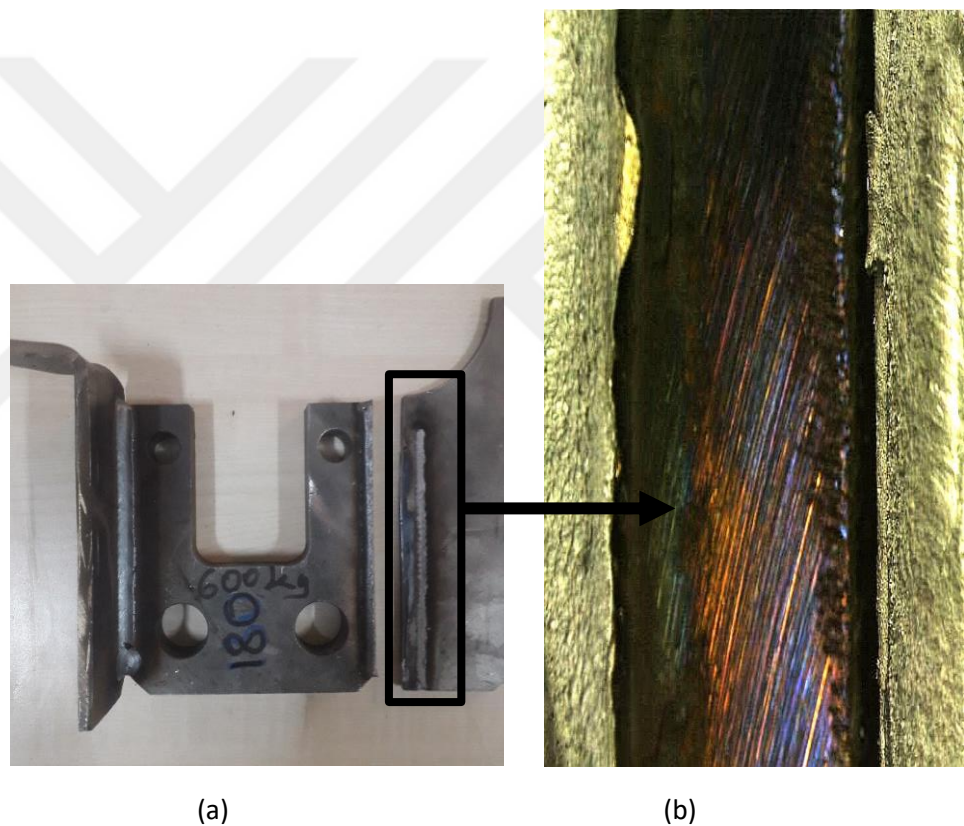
Test Results (a) A Fractured Sample (104 MPa) (b) Optical Image of a Failed Weld Region (“x10” Magnification)
